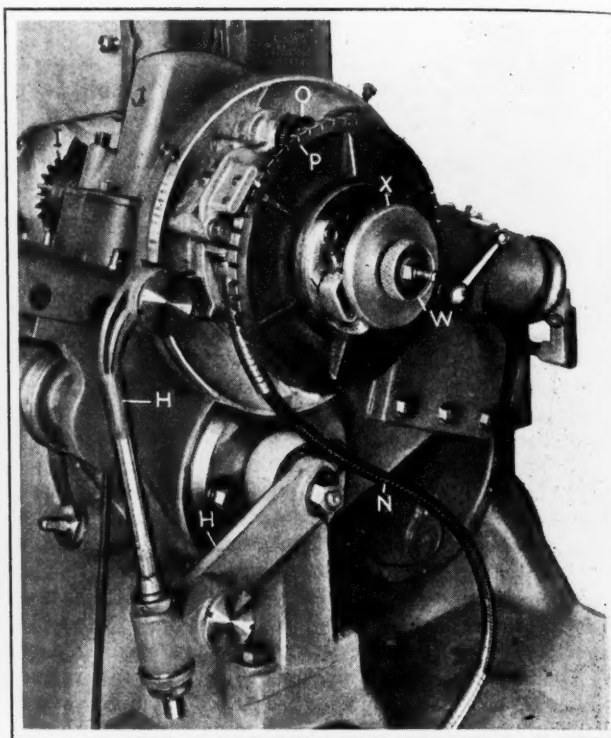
View showing Notched Wheel and Pawl used to lock Work-spindle after indexing
